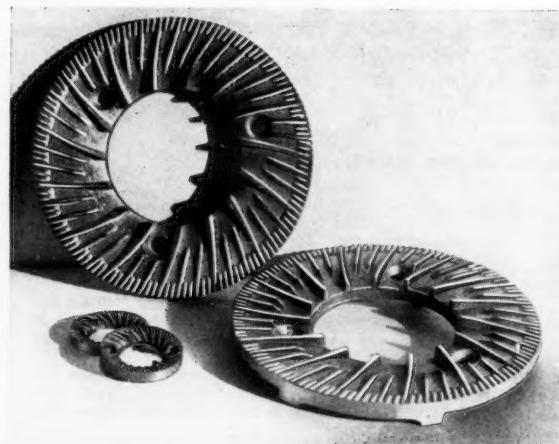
SAND CAST NI-HARD GRINDING BURRS IN A RANGE OF SIZES
